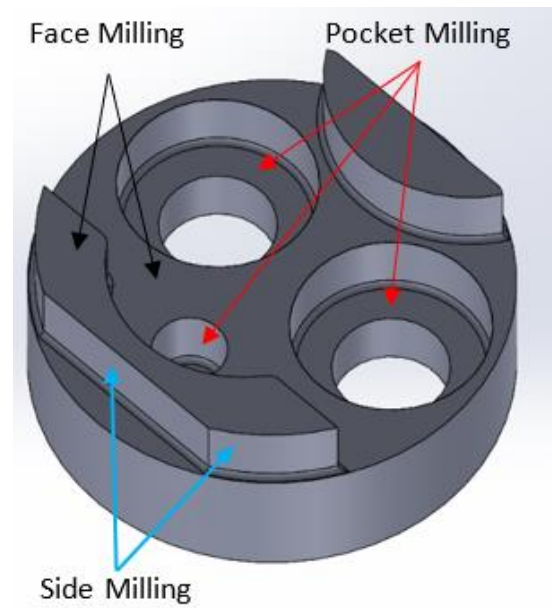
Workpiece to be machined in Cast Iron EN-EJS-500-7C.
